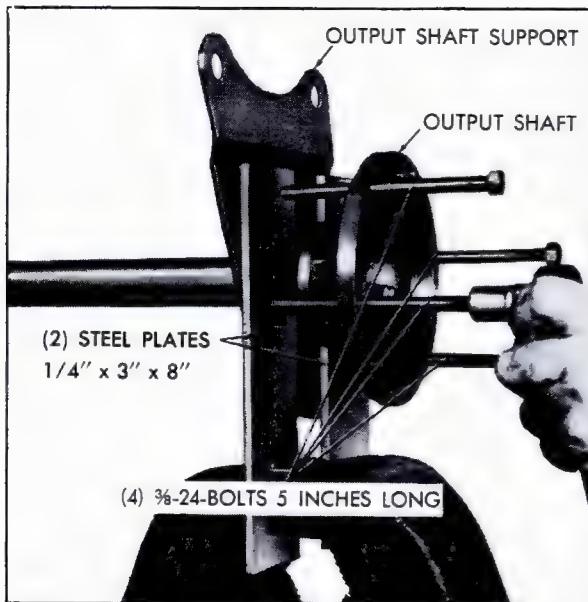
Removing Right Hand Output Shaft Support and Bearing
